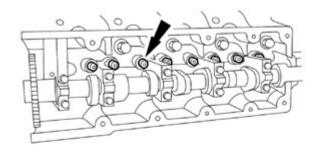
Removing/Installing Valve Spring Retainer Keys Courtesy of FORD MOTOR CO.
